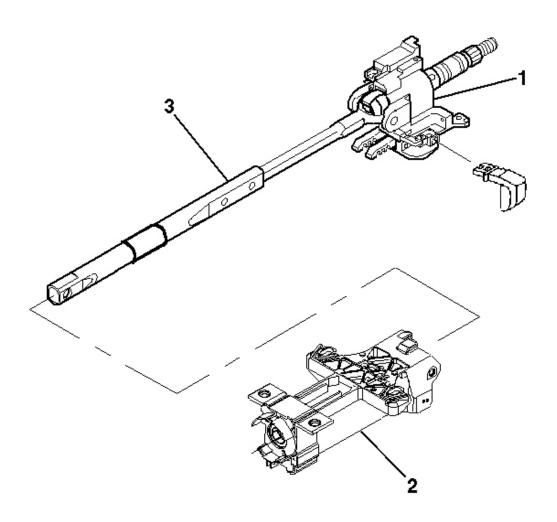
View Of Upper Steering Column Components Courtesy of GENERAL MOTORS CORP.
